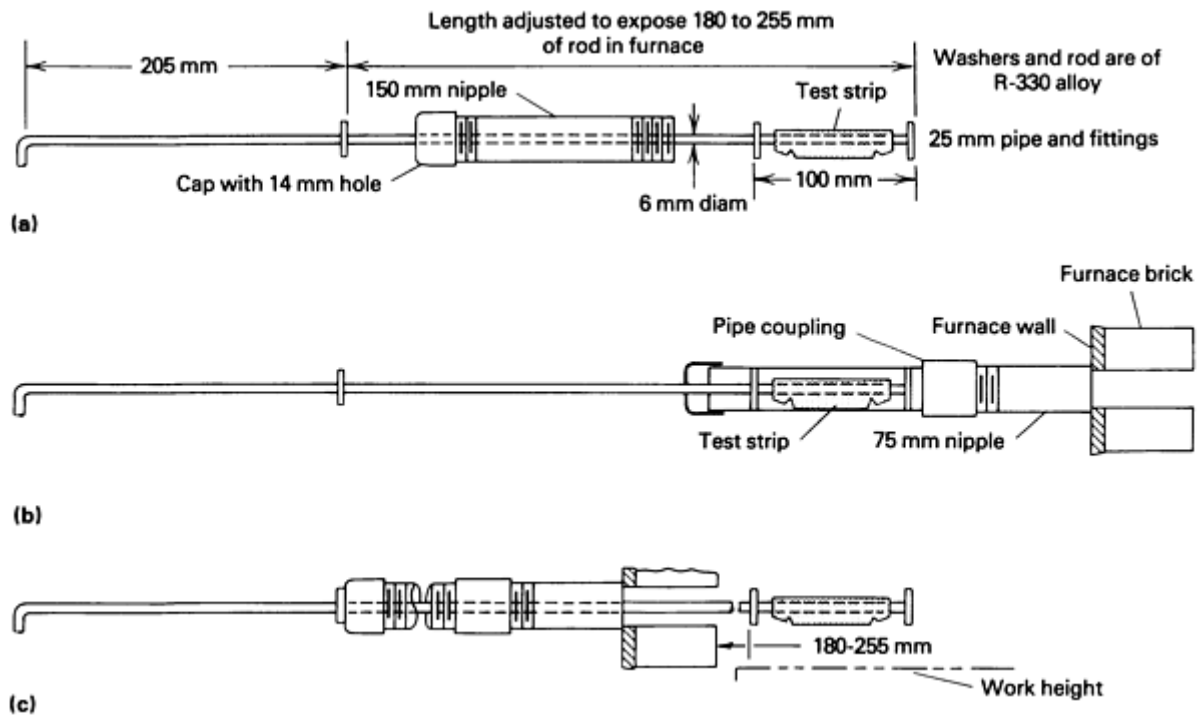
Arrangements for exposing shim stock to furnace atmosphere for evaluation of carbon potential. (a) Assembly of test strip for determination of carbon potential. (b) Assembly of test strip on rod attached to furnace wall in preparation for insertion into furnace (same position used for cooling of test strip). (c) Test strip inserted into furnace above work in unobstructed stream of furnace atmosphere. (See text.)
